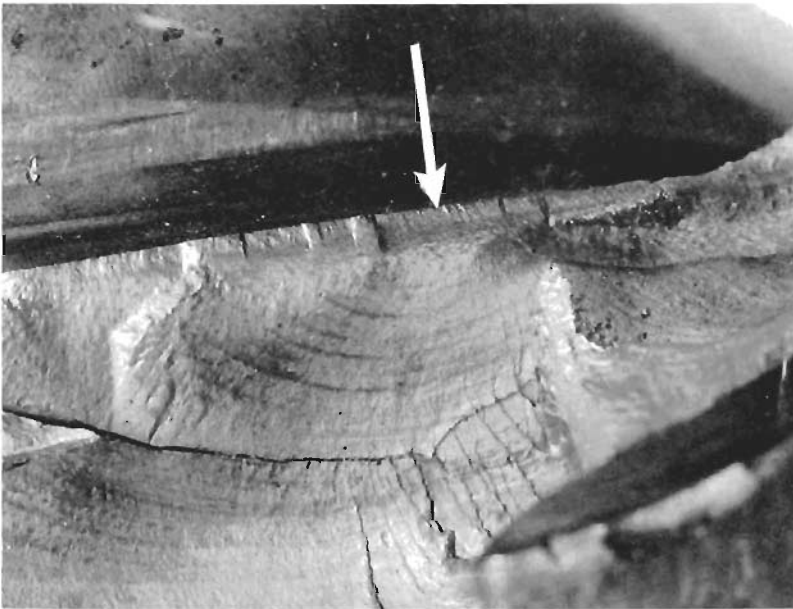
Spiral bevel pinion tooth, 2 \times . Tooth bending fatigue with origin (arrow) at the root radius, exactly midway between the ends of the teeth.
